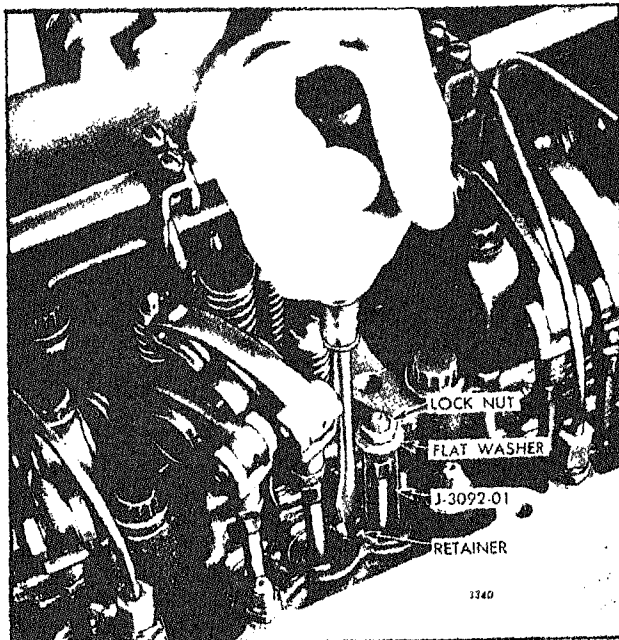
Removing Push Rod from Upper Side of Cylinder Head with Tool J 3092-01
